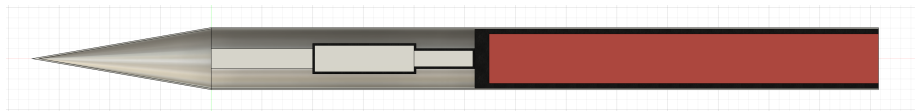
Cross Section View of Rocket Body with Insulation Layer
